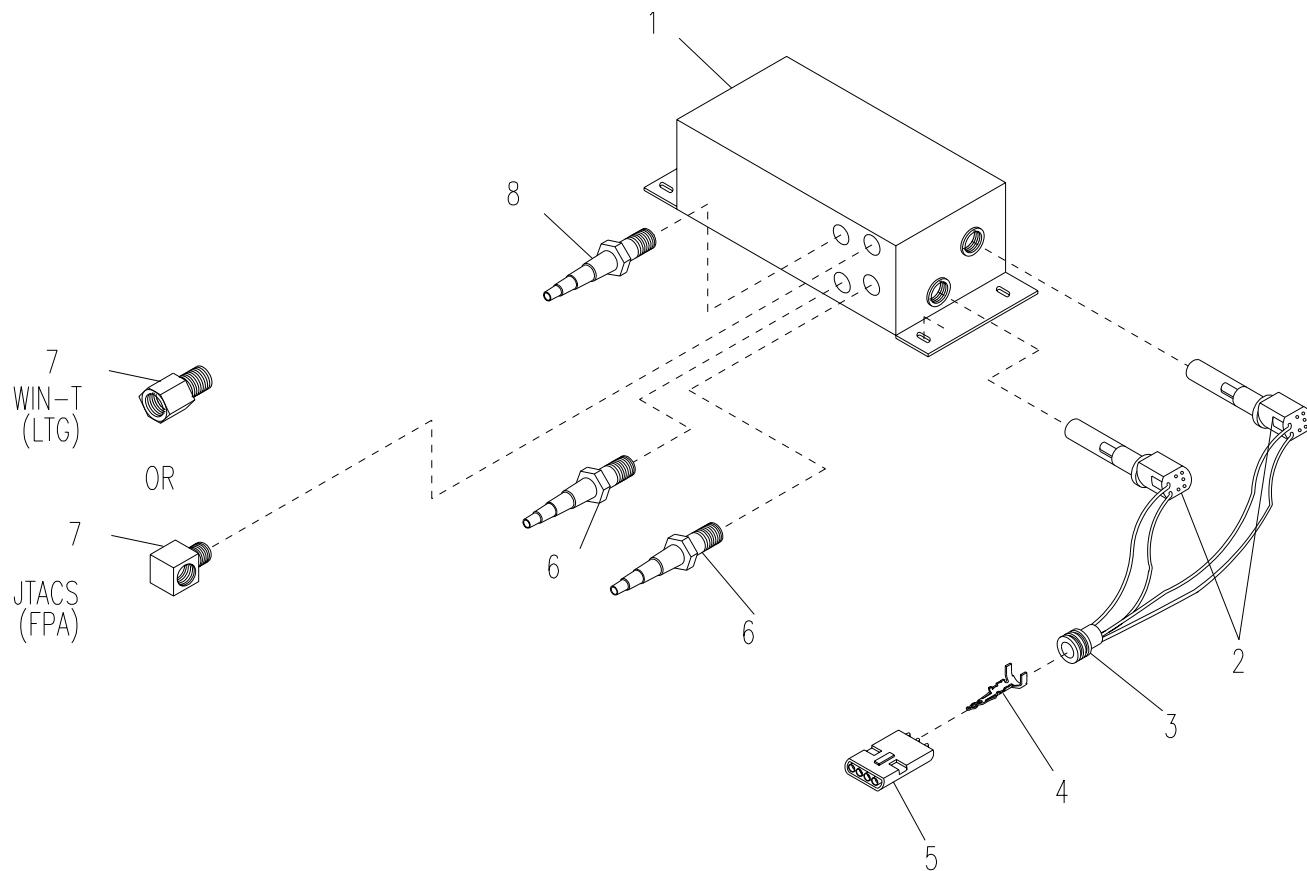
Fuel Day Tank Assembly, JTACS/WIN-T
